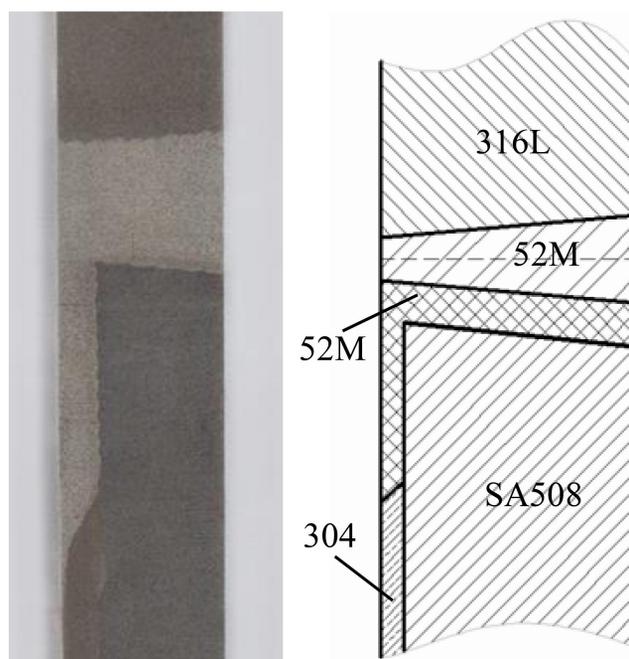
Schematic diagram of the material component of a dissimilar welded joint in a pressure vessel
